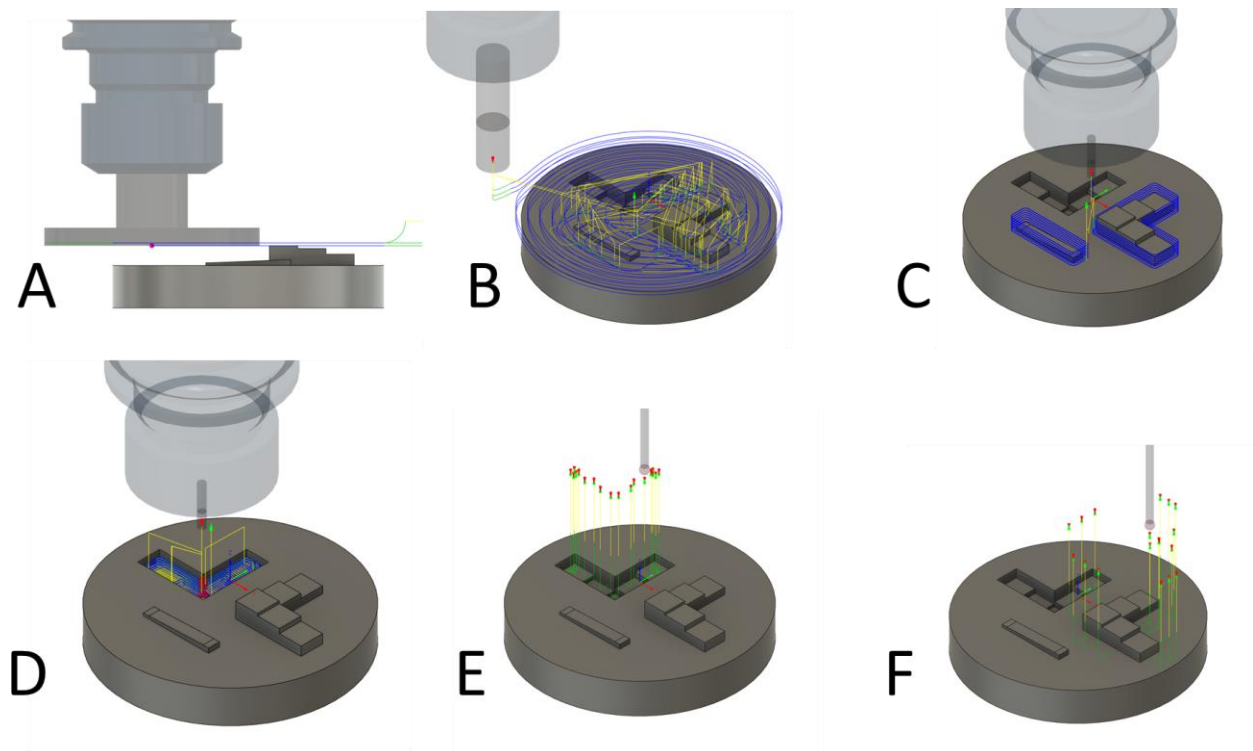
Subtractive NIST Geometry Machining and Inspection Operations
